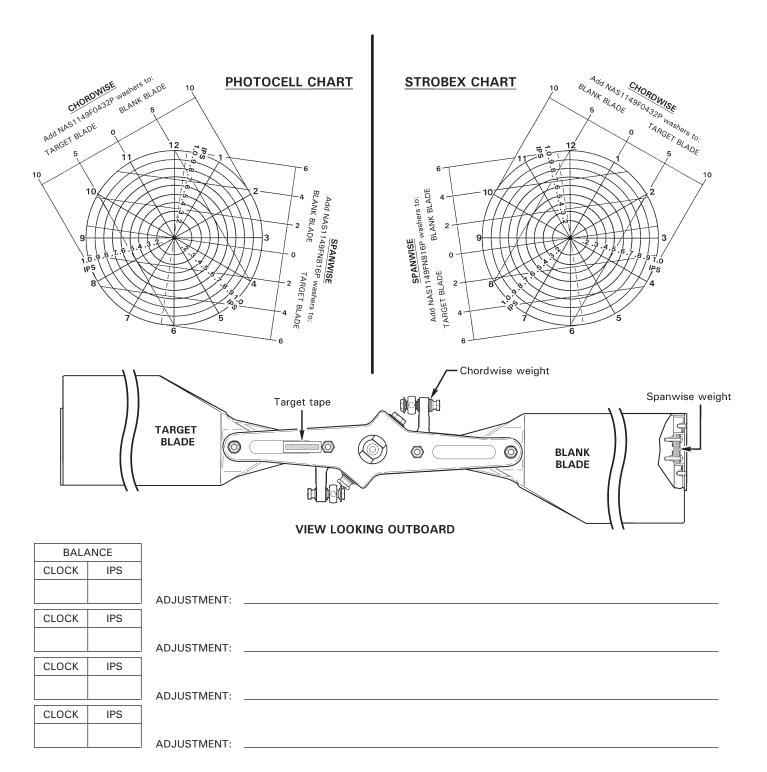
C008-2 TAIL ROTOR ASSEMBLY DYNAMIC BALANCE CHART
